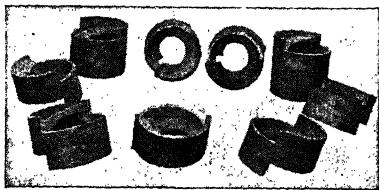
Alloy parts which when assembled form a tube with an internal spiral for conveying parts being heat-treated.
